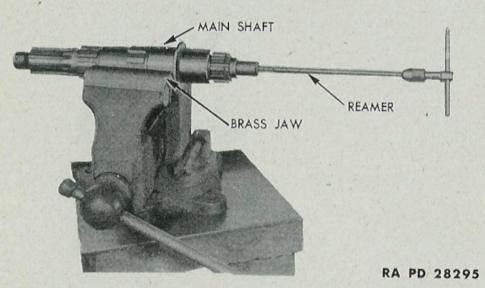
Cleaning Oil Passage of Main Shaft with Reamer 41-R-848
